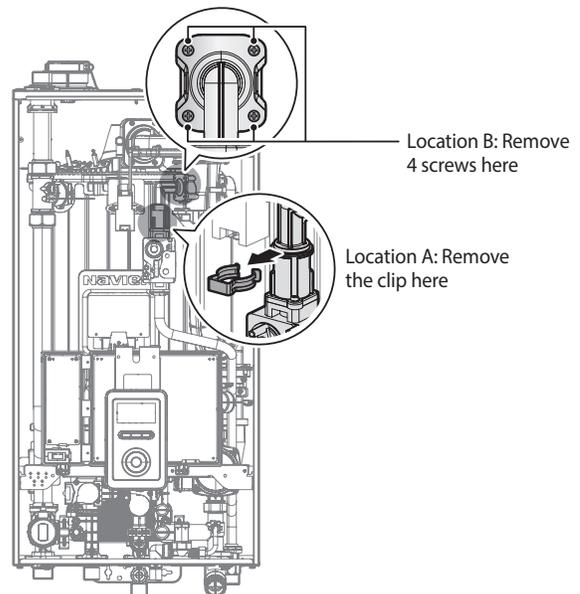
Detaching the Gas Valve Outlet Adapter from the Gas Valve and Fan Motor Assembly
